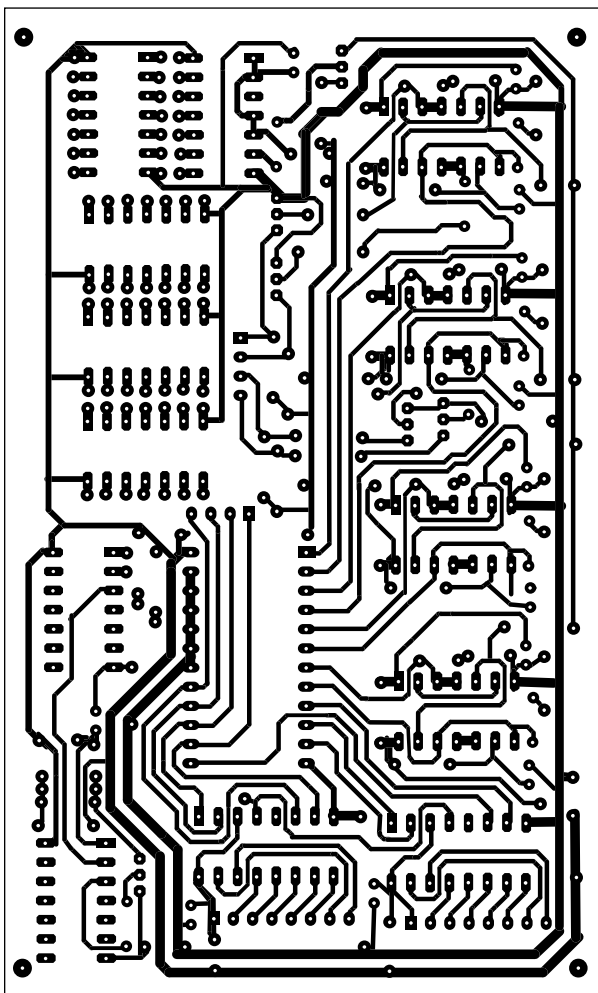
Actual-size single-sided PCB pattern suggested for the circuit of Fig. 1
